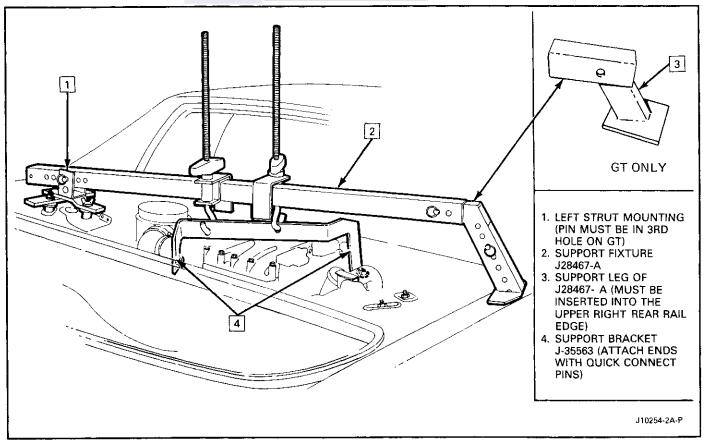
Engine Support Fixture Mounting (2.8L and GT)
